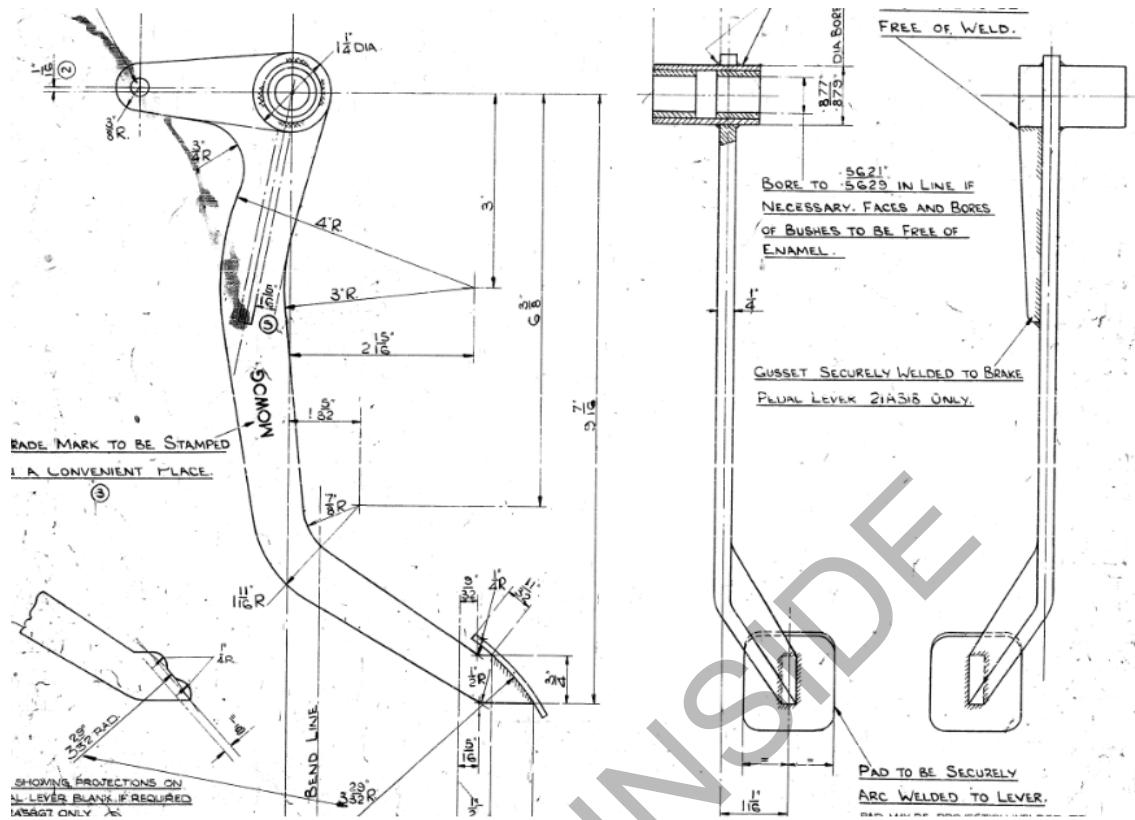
Brake and clutch pedals 2A5866.
